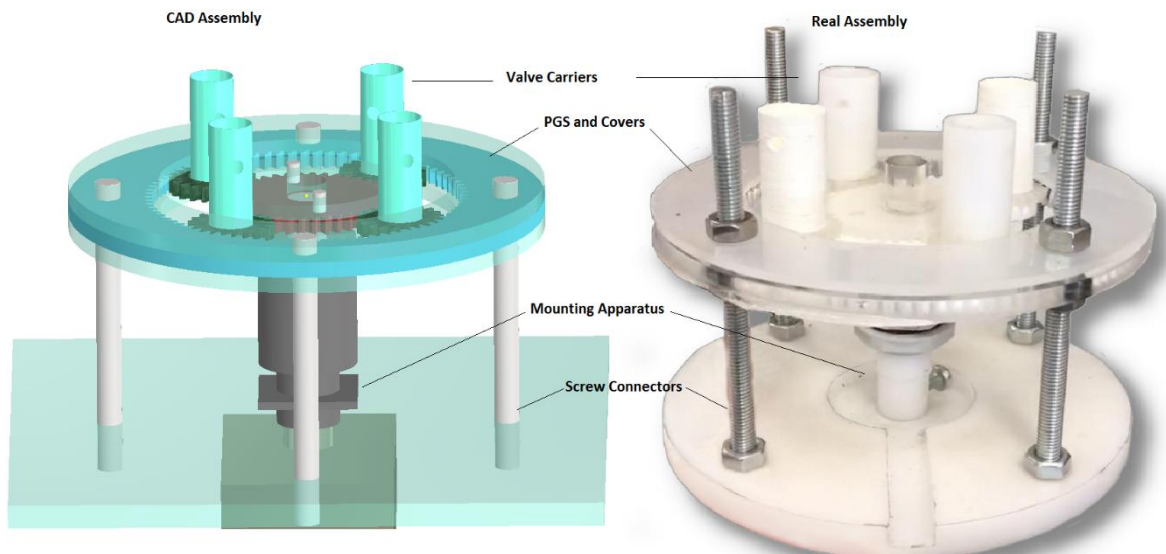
On the left CAD assembly, on the right the real assembly of the Spinning Device.
